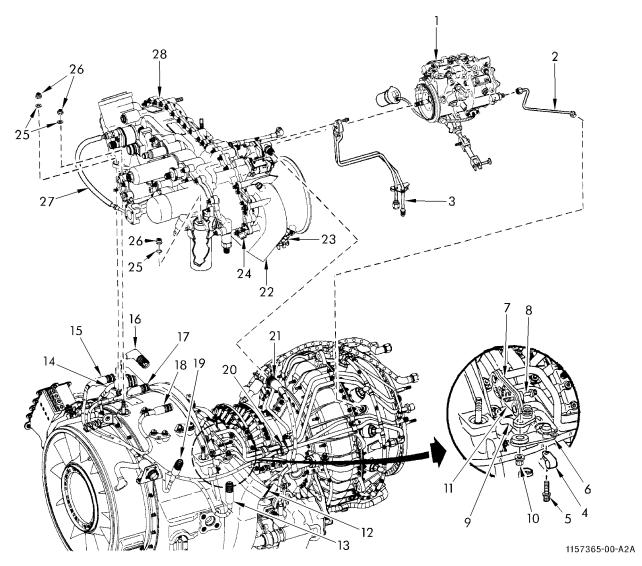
(T700, T701C, T701D) Accessory Section Module, Removal and Installation
